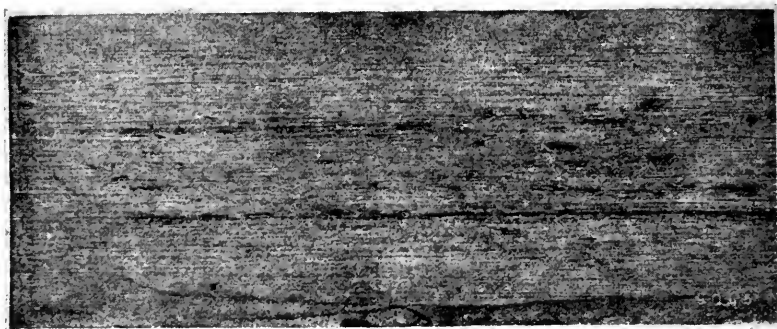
ETCHED HORIZONTAL SECTION AT END OF RAIL 9095.
